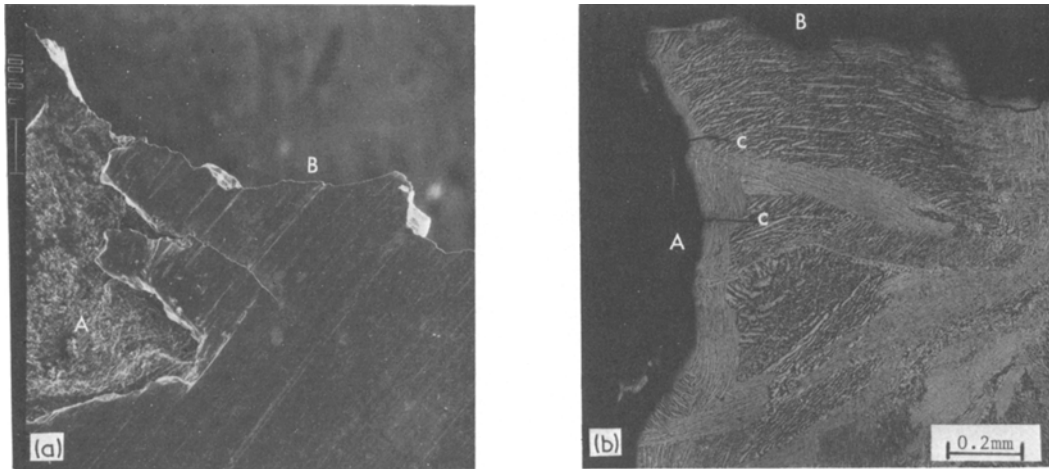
Specimen 127. (a) Large unhealed casting pore (A) on the surface of the specimen, which in spite of its size (1 mm) and its location near the fracture zone, did not initiate the final fracture (B). (b) A section through pore A showing the final fracture B which initiated from the GB α in Fig. 3b. The microcracks C which developed in this region did not grow fast enough to cause the final failure.
